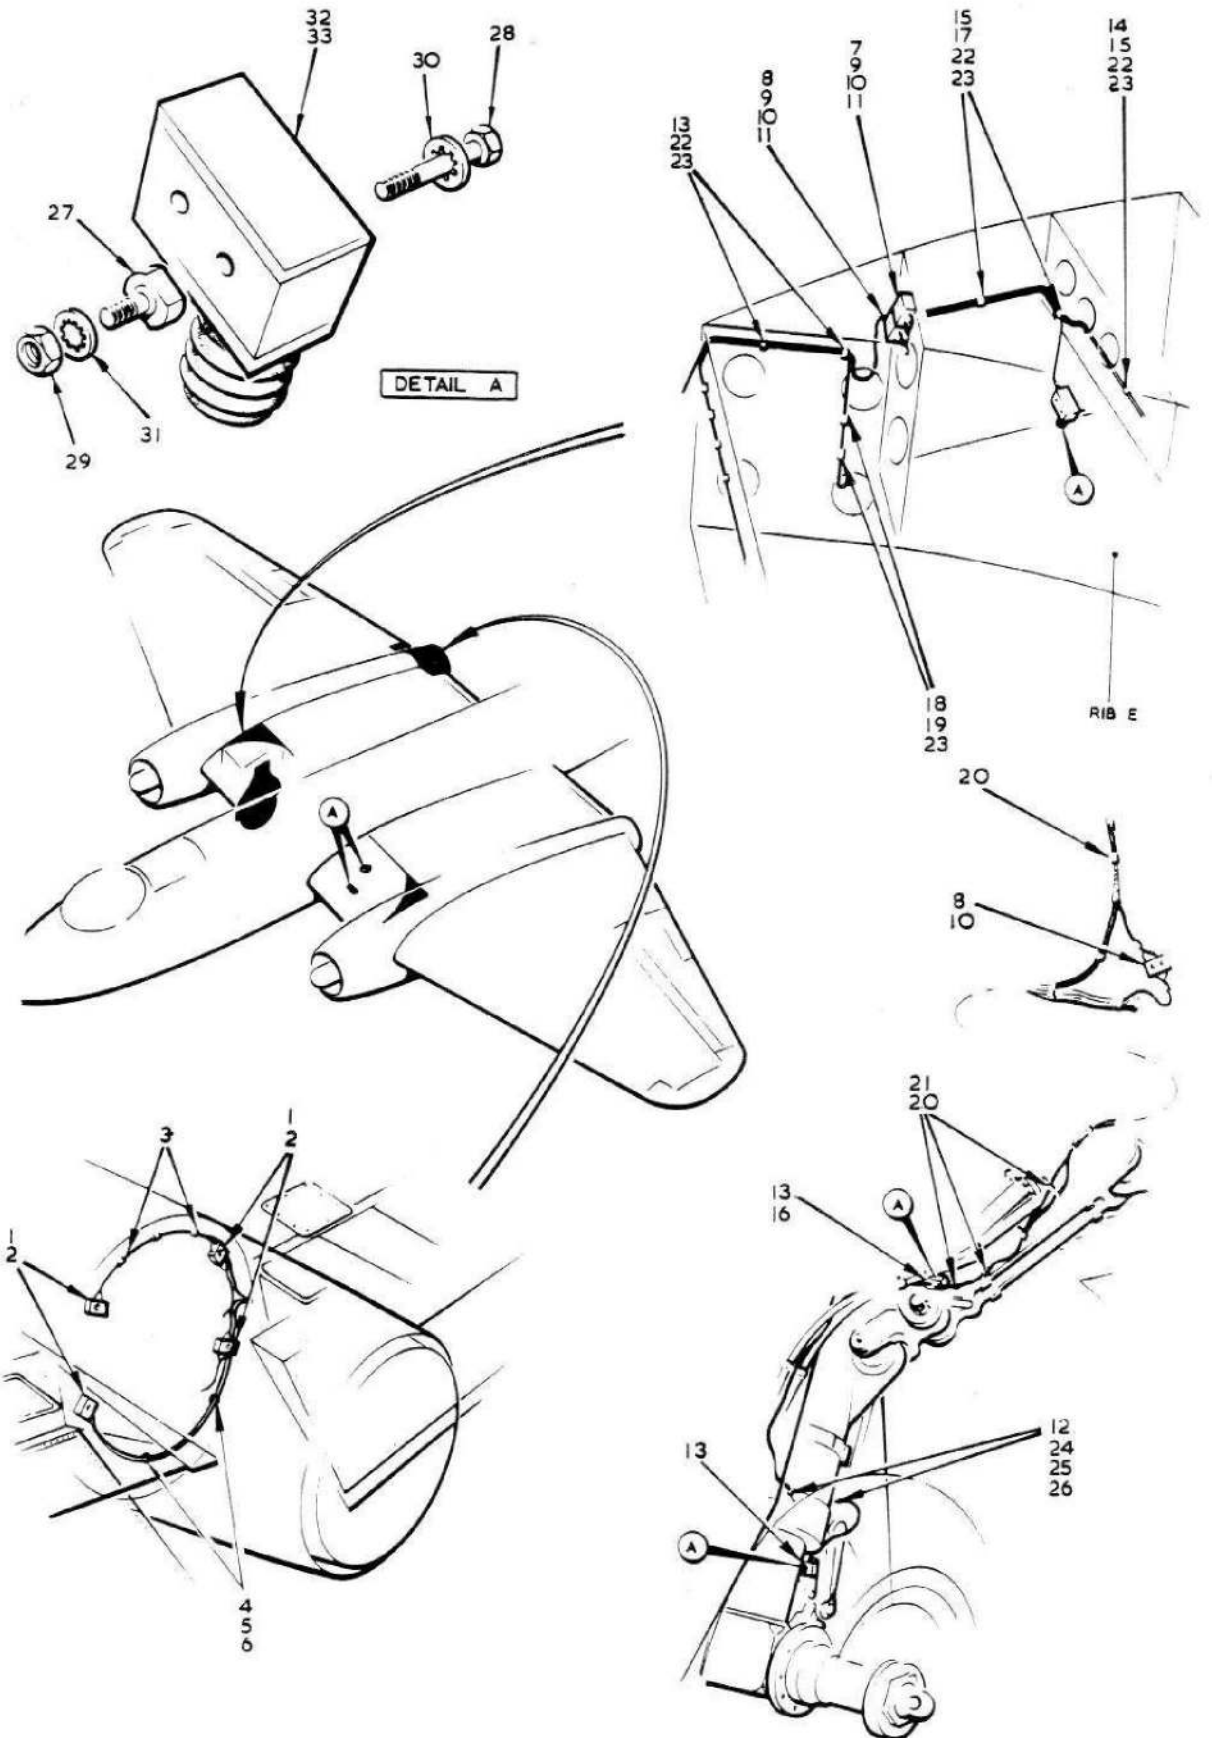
ELECTRICAL EQUIPMENT IN WINGS
